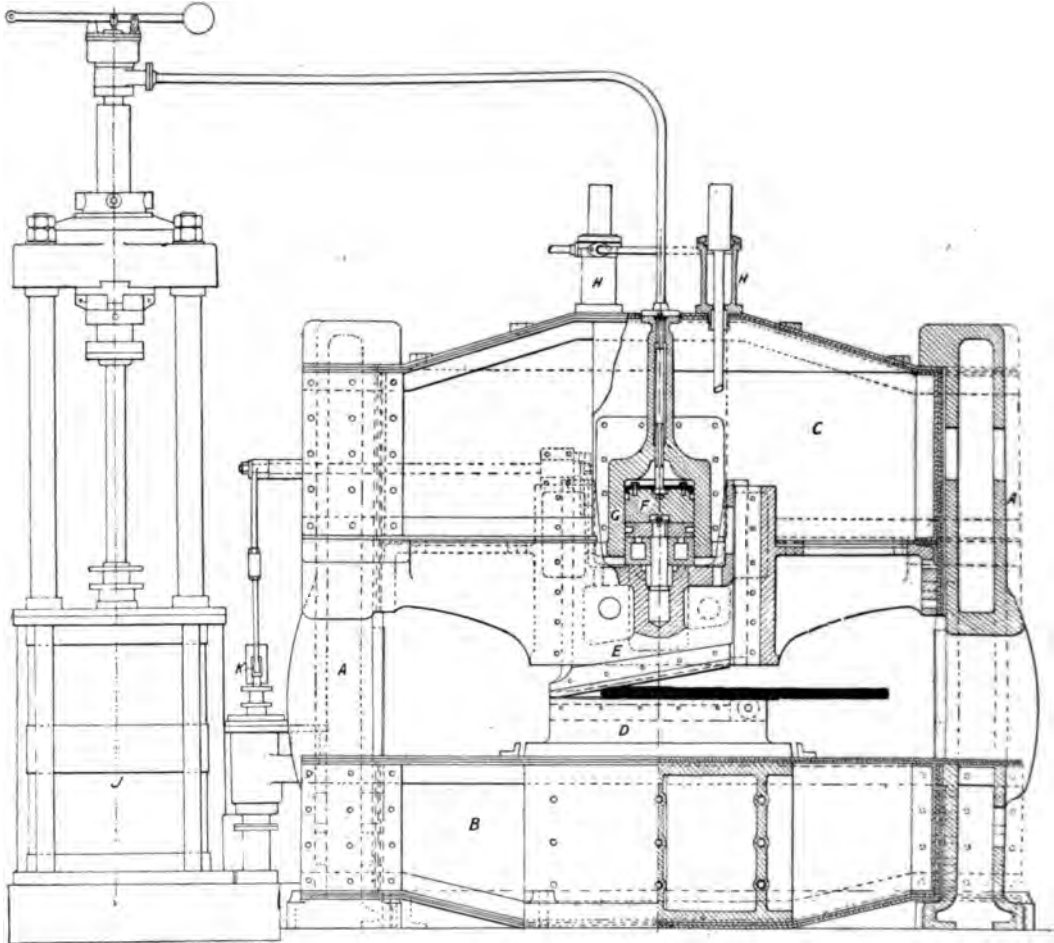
Double Standard Hydraulic Plate Shears. (Front Elevation.)
